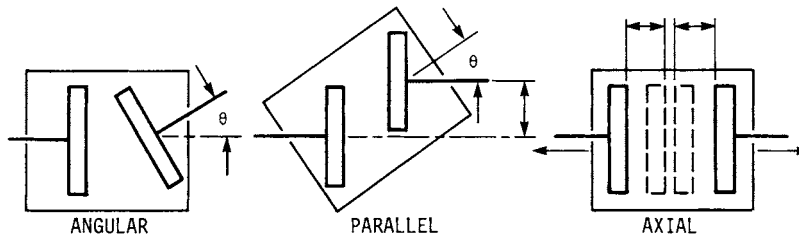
How double-engagement gear couplings accommodate angular, parallel, and axial misalignment.
